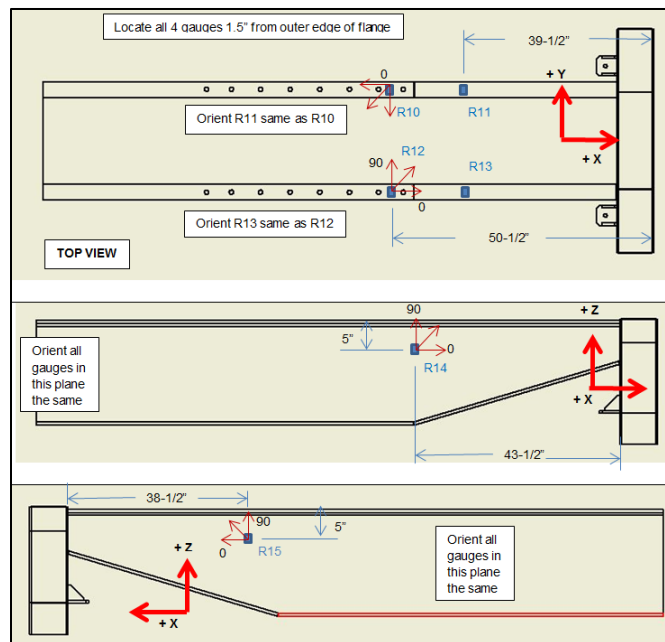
Draft Sill Rosette Gauge Locations – Coupler Failure Test
